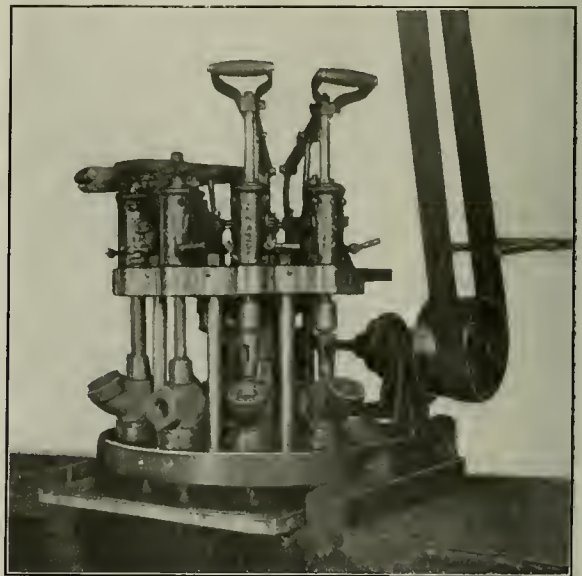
Five Spindle Angle Cock Grinding Machine
